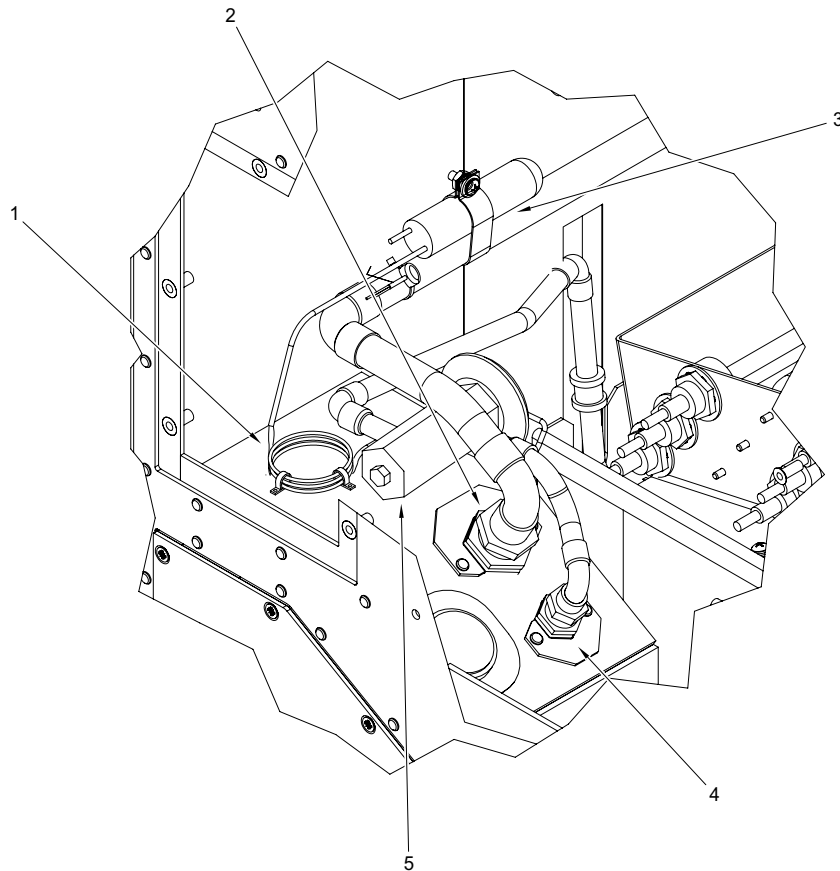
EVAPORATOR COIL - MALE COUPLING HALF AND THERMOSTATIC VALVE.
